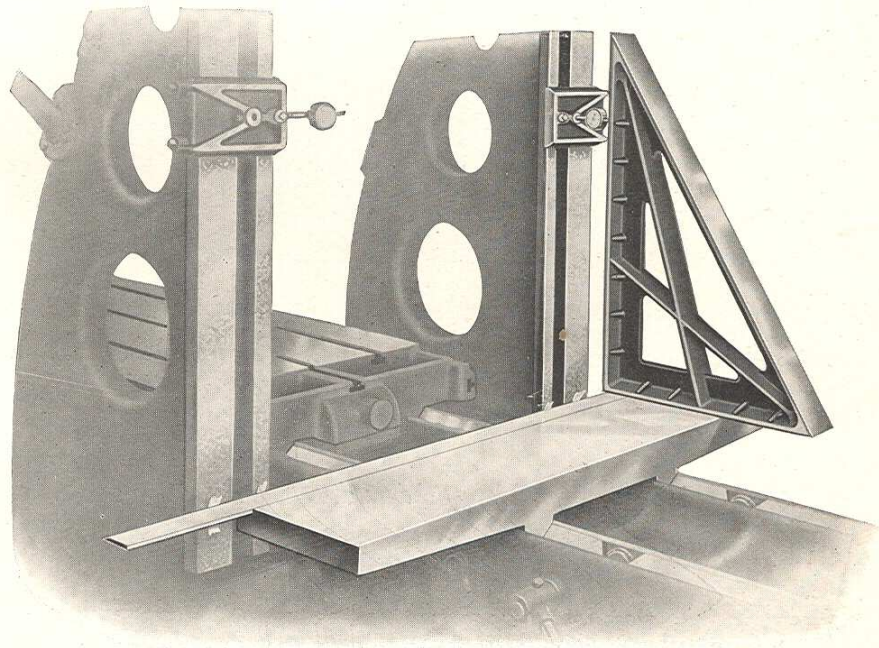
Testing Front Alignment and Faces of Housings.
